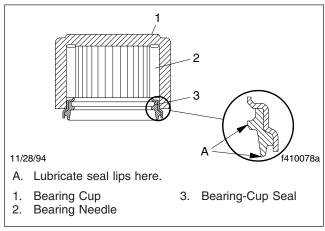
, Sectional View of a Half-Round End-Yoke U-Joint Bearing Cup
